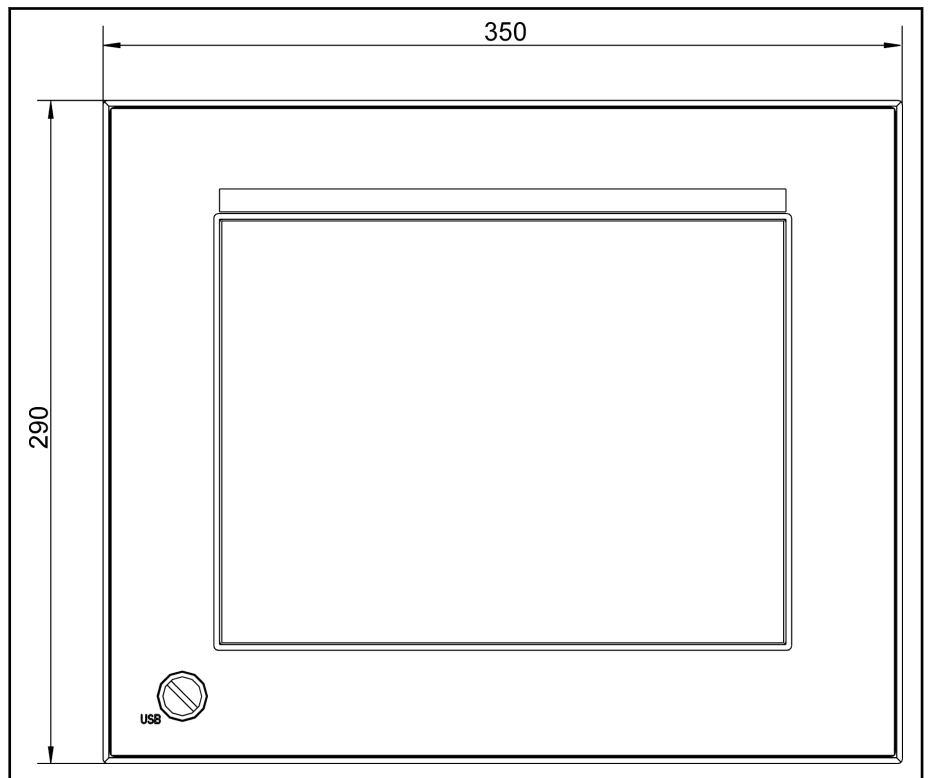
Dimensions: Front panel of the VDP 16.3DB
